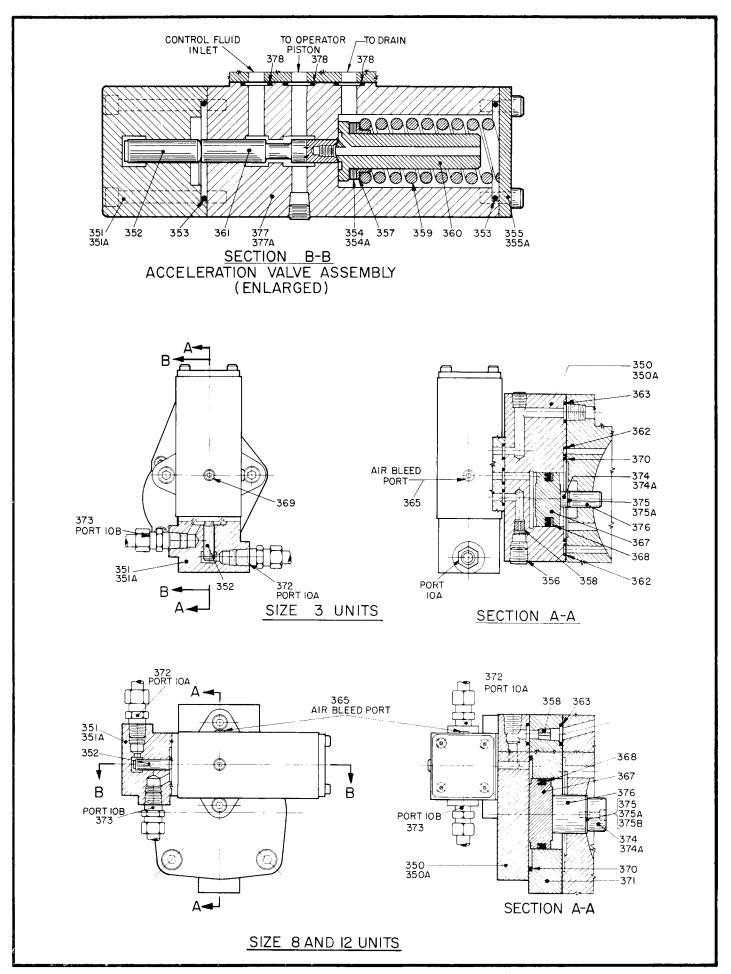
Parts Drawing, Type "C" Opposing Operator DS-947930 (505081).
